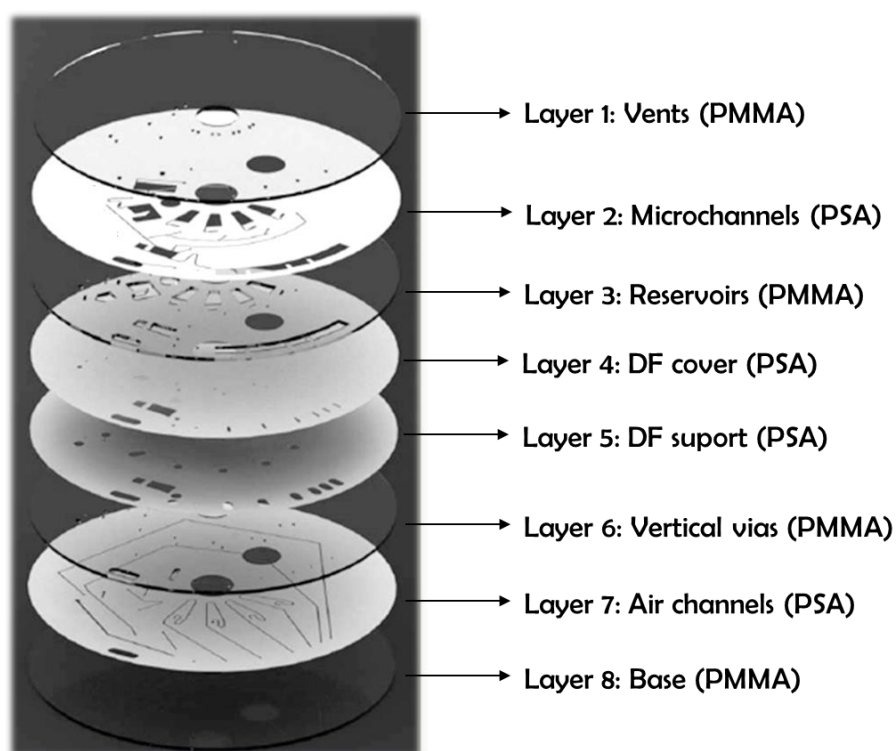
Detail of disc assembly. The disc is manufactured from eight layers which are assembled into a multi-layer architecture. The discs were assembled on an alignment jig and were rolled using a laminating machine.
